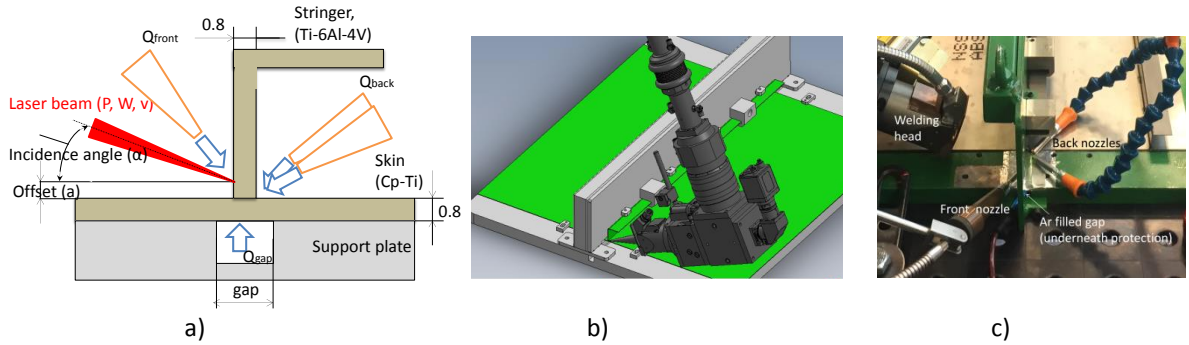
(a) scheme of welding configuration; (b) clamping system and (c) shielding system configuration
